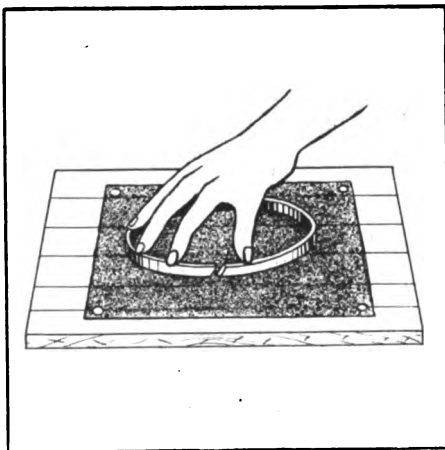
Grinding the Ring on Piece of Fine Emery Paper Fastened to Smooth Board.
